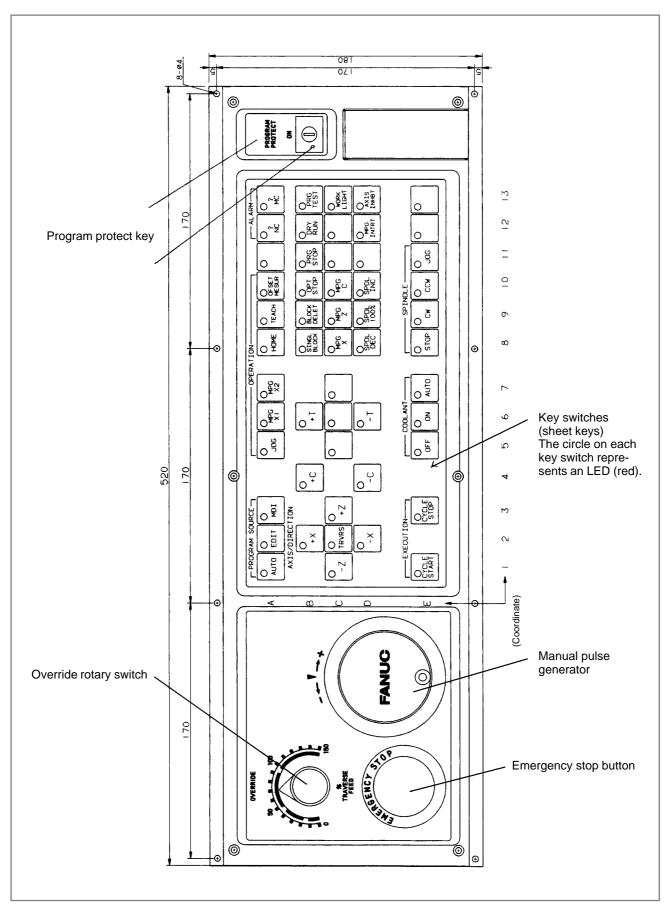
(c) Front view of machine operator's panel for standard unit (T series)
